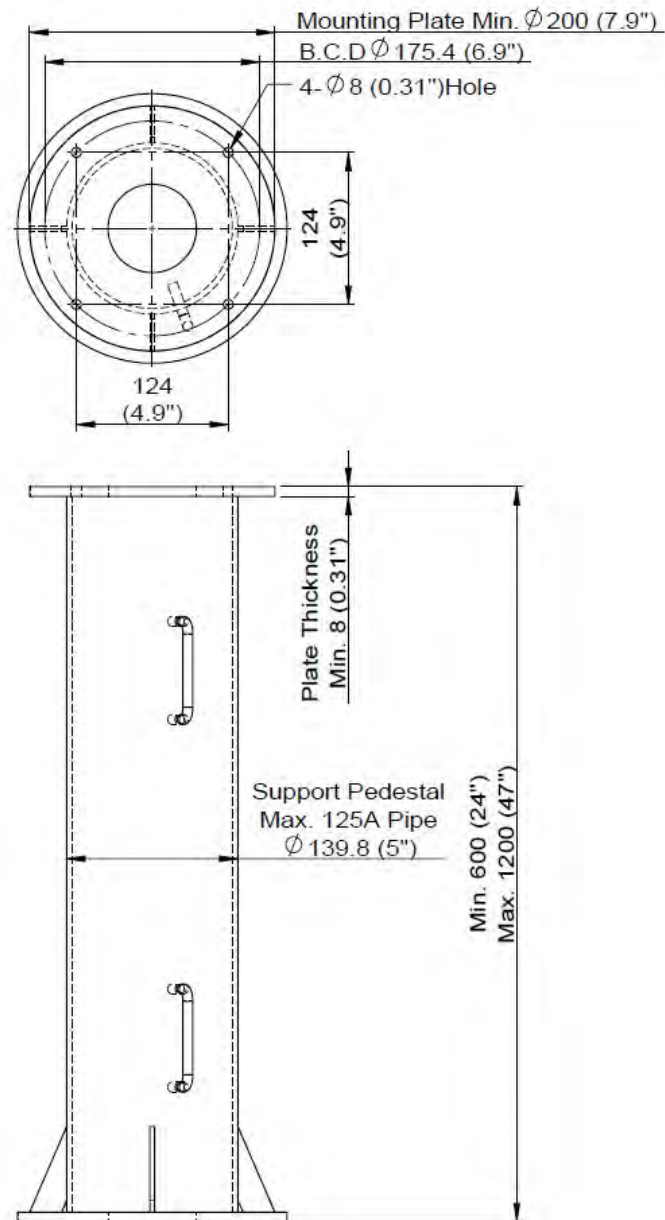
Recommended Mast Design using C200M Outer Common Holes (with M6 Bolts)
